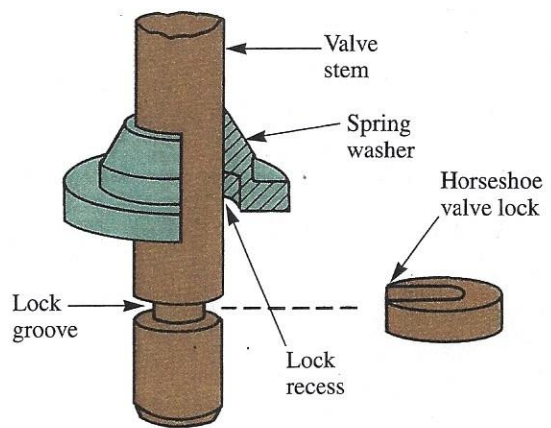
Typical method of retaining valve spring on valve stem. Special tool generally is used to compress spring prior to removing horseshoe valve lock.
